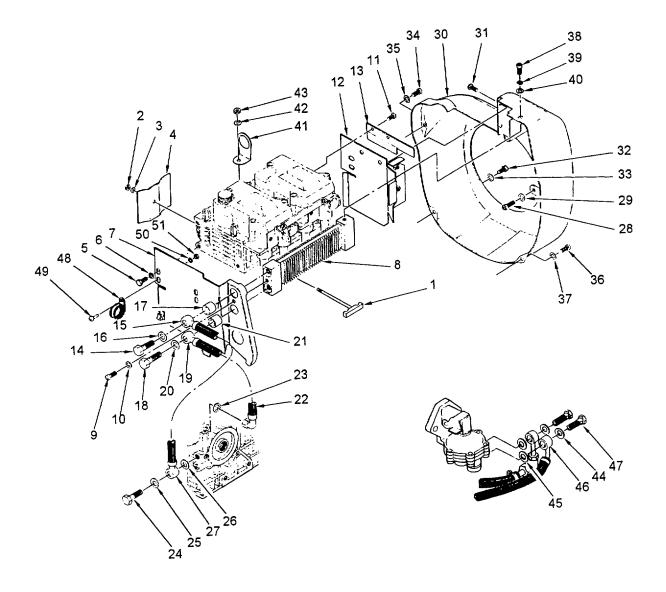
Shroud, Gates and Oil Cooler Installation
